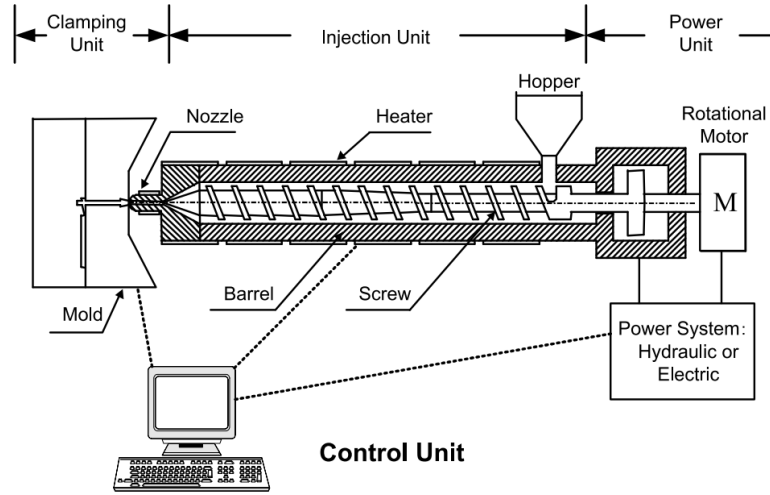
Schematics of a screw-type injection moulding machine (Chen, 2016).
